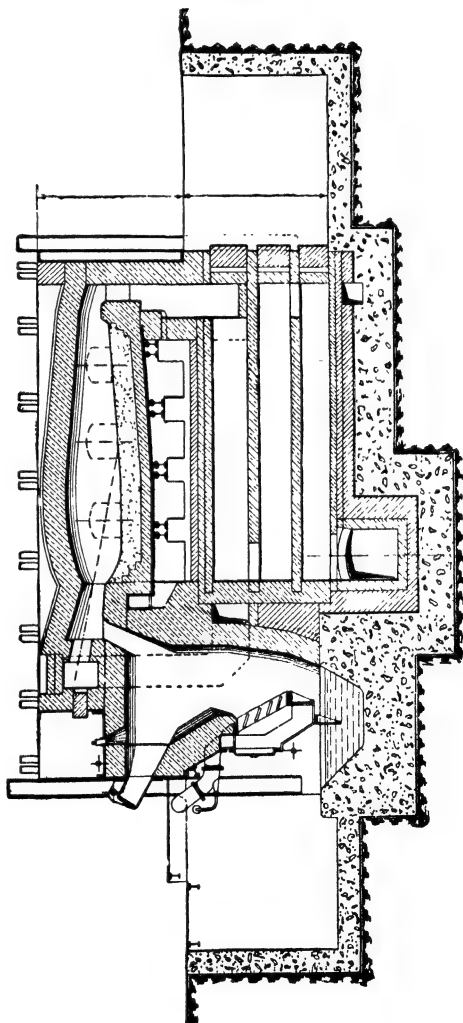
Forge and Welding Furnace with Recuperator (W. Ruppmann)
